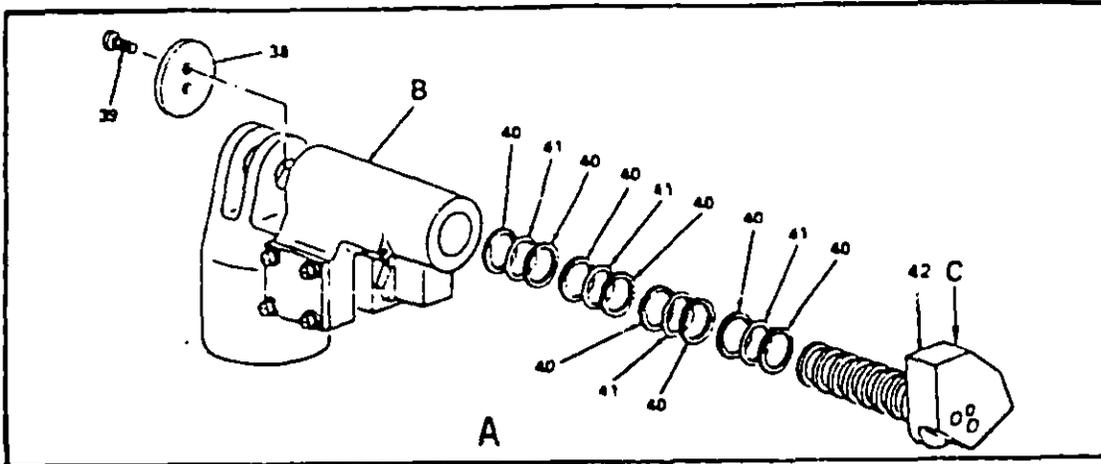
Actuator Assembly Main Landing Gear Uplock Hydraulic, Part Number 12345 (Sheet 2)
